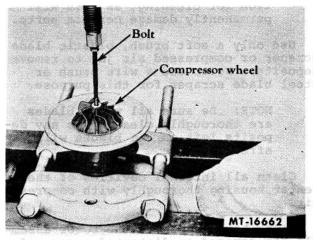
Separating Compressor Wheel From Turbine Shaft.
